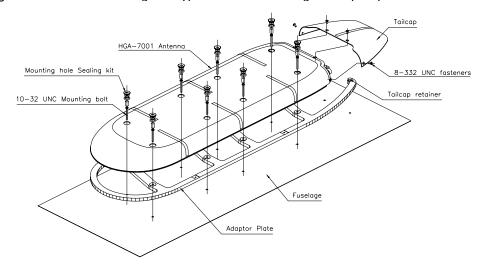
An illustration of how the HGA-7001 is mounted on an adapter plate.
